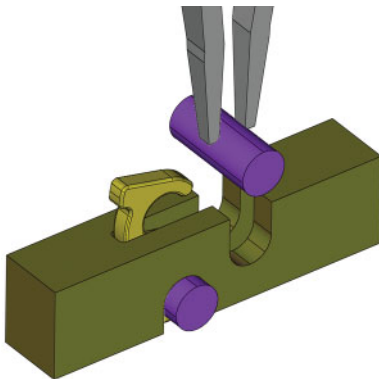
INSTALL THE DEVICE SIDE ELASTOMER.
